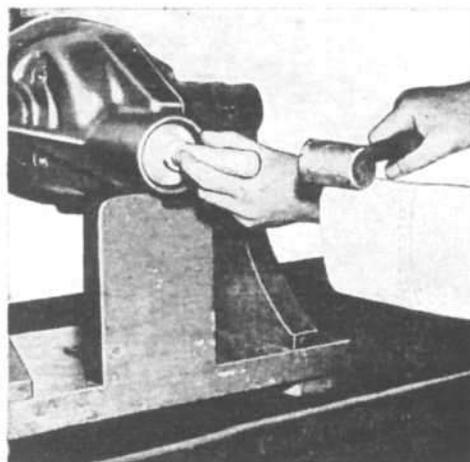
PINION SHAFT FRONT BEARING CUP DRIVER
